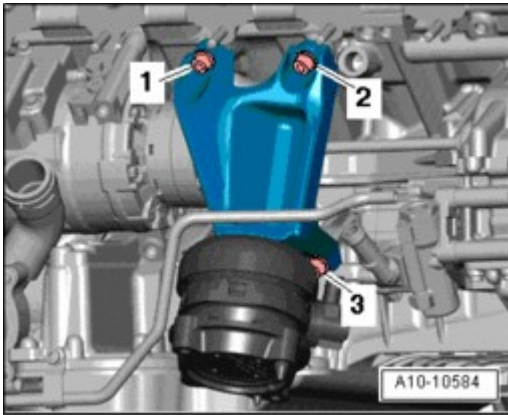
Identifying Special Tools - Engine, Securing To Engine And Transmission Holder
